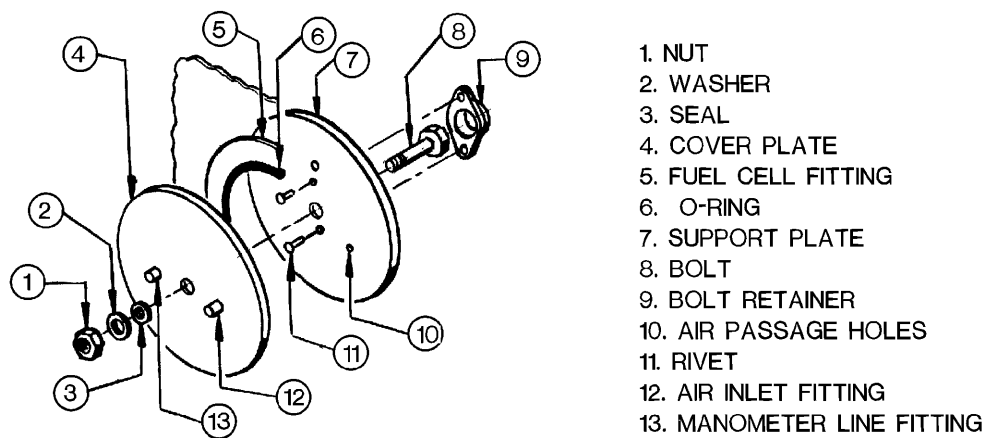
Fuel Cell Fitting Leak Test Cover Plate
